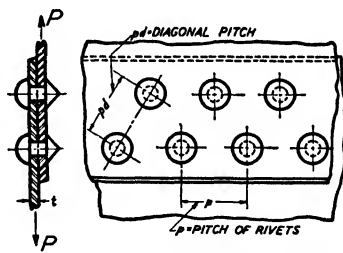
Double-Riveted Lap Joint, Zigzag Riveting
